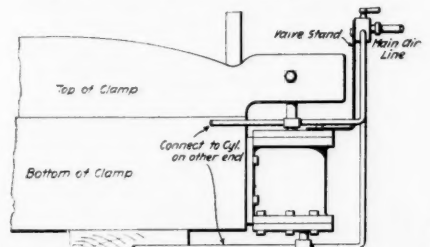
Attaching Air Cylinders to Boiler Clamps.
